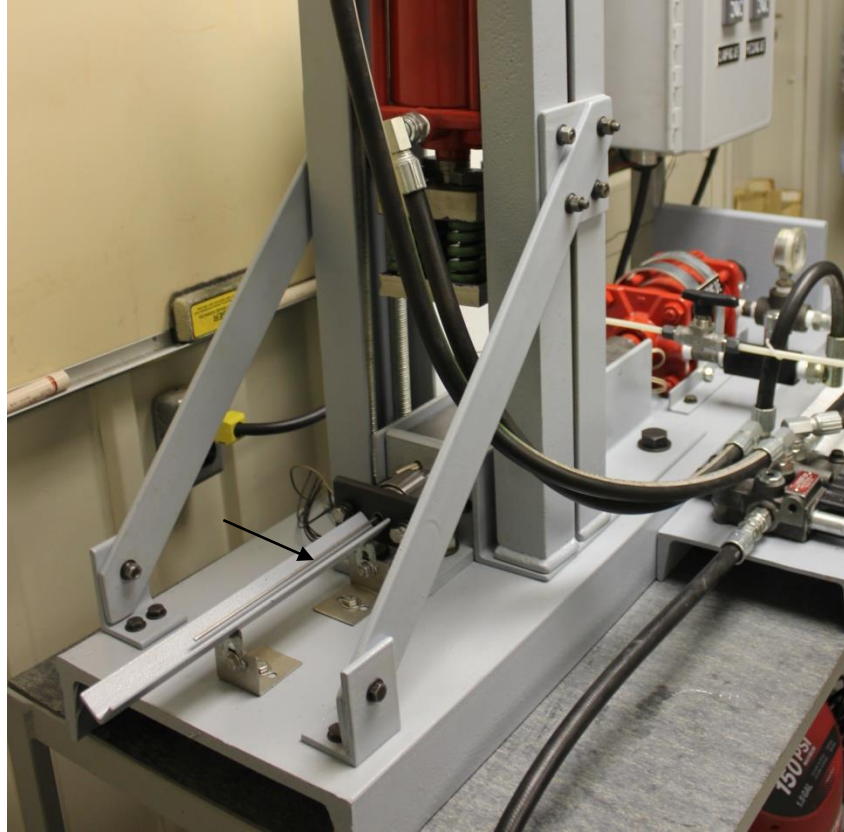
Continuous rod inserted through back side of clamping chuck and die ready for pressing
